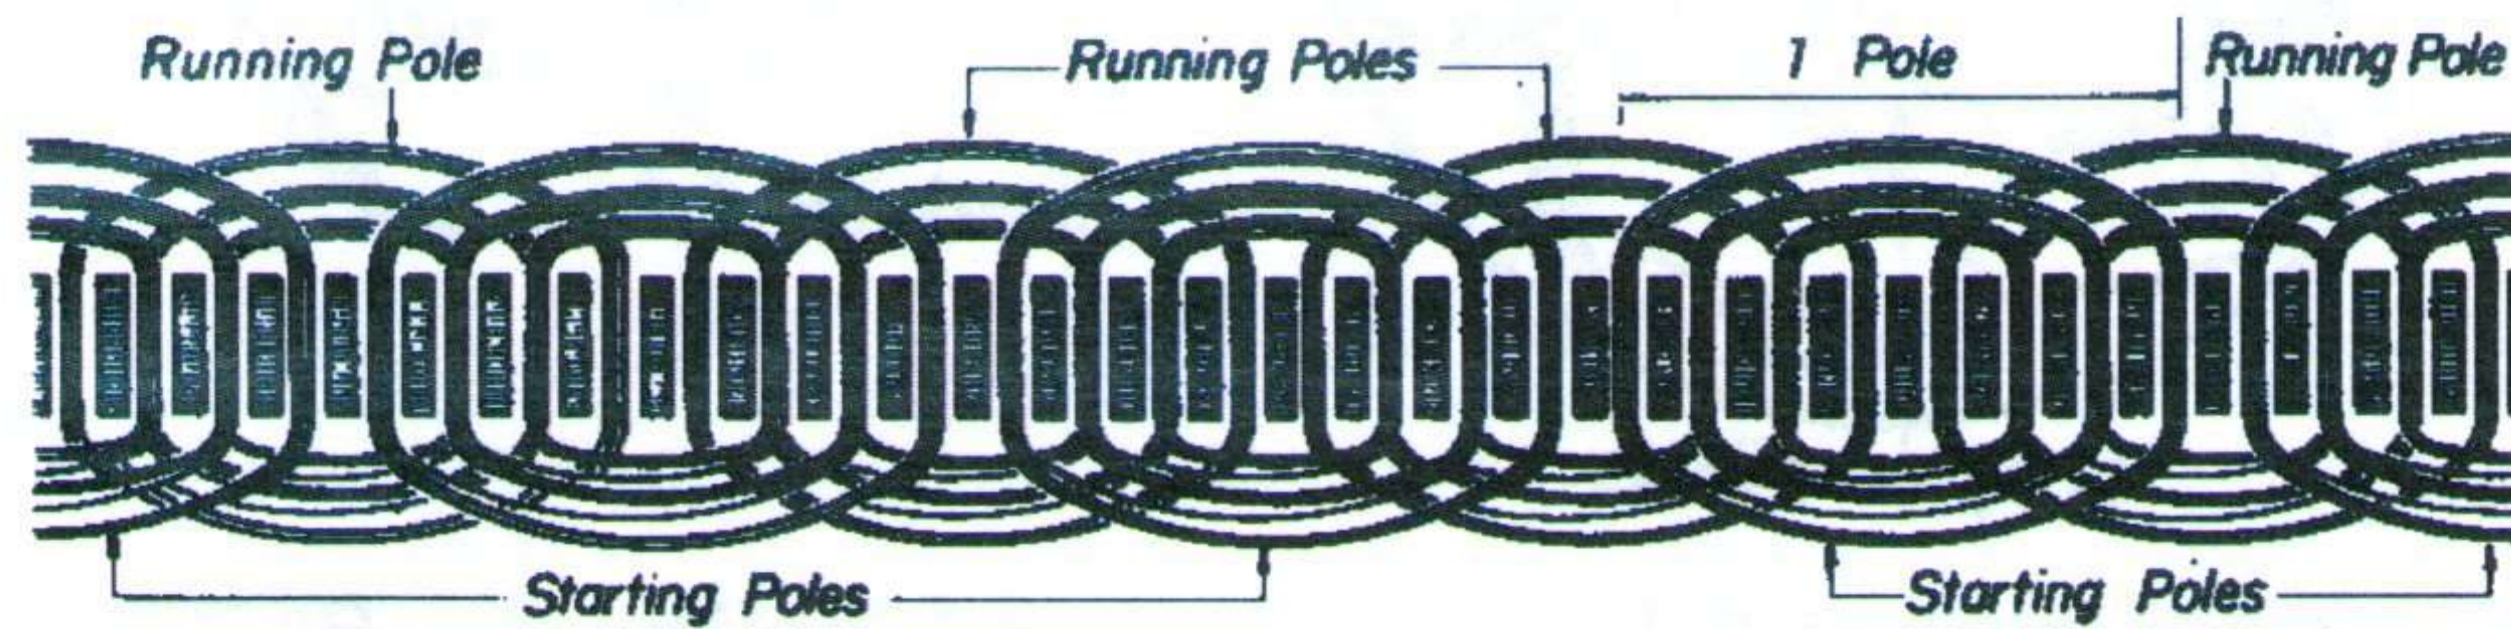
A diagram of the stator in Fig. 10 with slots and windings shown as they would look if rolled flat. The starting-winding poles are located between two running-winding poles.
